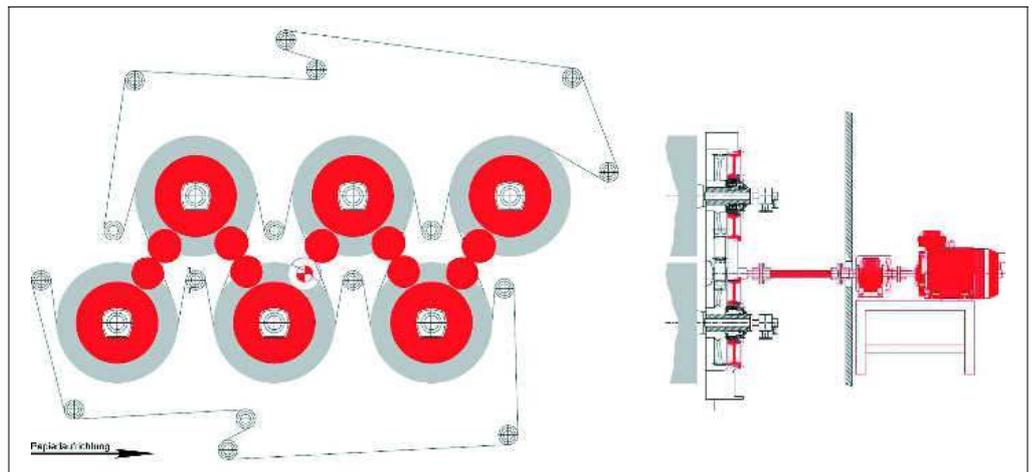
Drive layout of the gear wheel housing of the fourth dryer group
